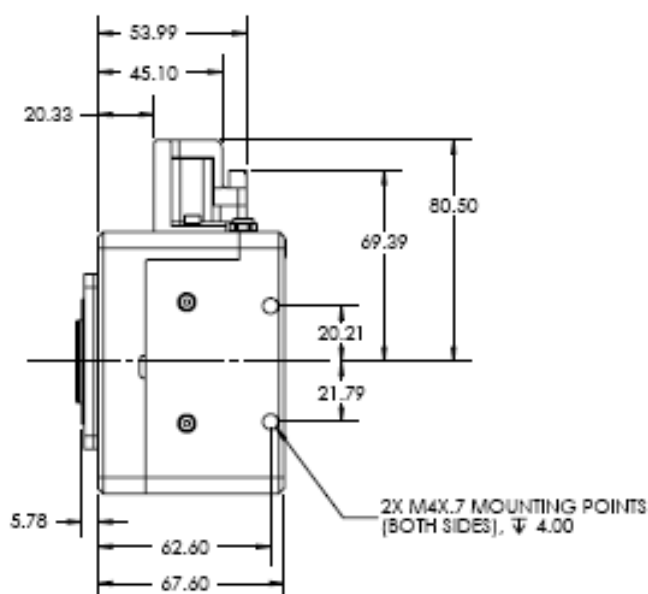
Camera Head dimensions and mounting holes, side (in mm)
